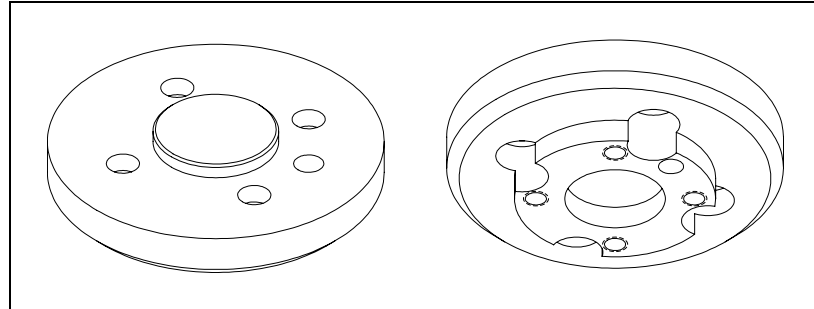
Viper 650/850 Outer Adapter Plate.
